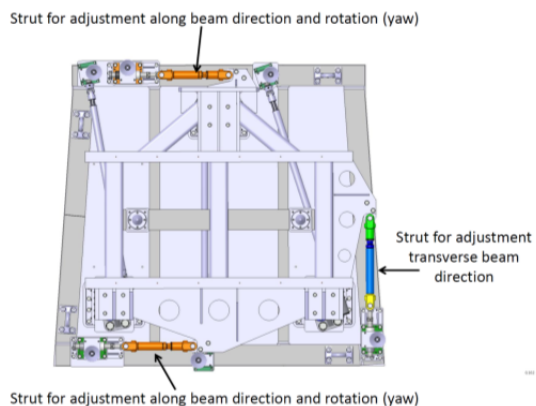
Top view on the support frame. A 3-strut system is used for horizontal adjustments.
